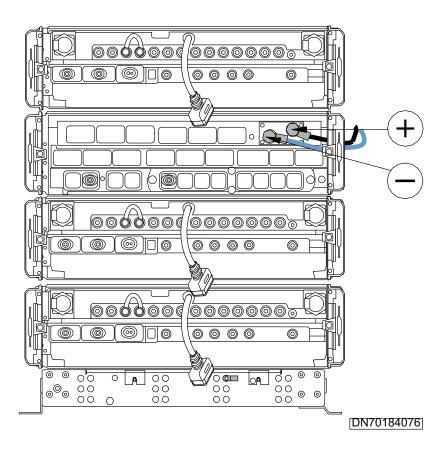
External power cables in 1+1+1/2+2+2 stack configuration
